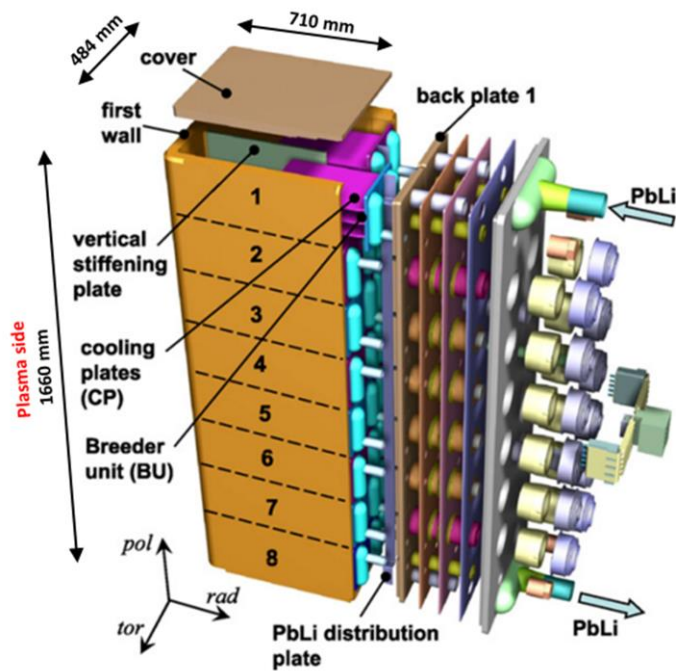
b – Exploded view of the Helium Cooled Lithium Lead – HCLL test blanket module design proposed by CEA (Source: [8])
